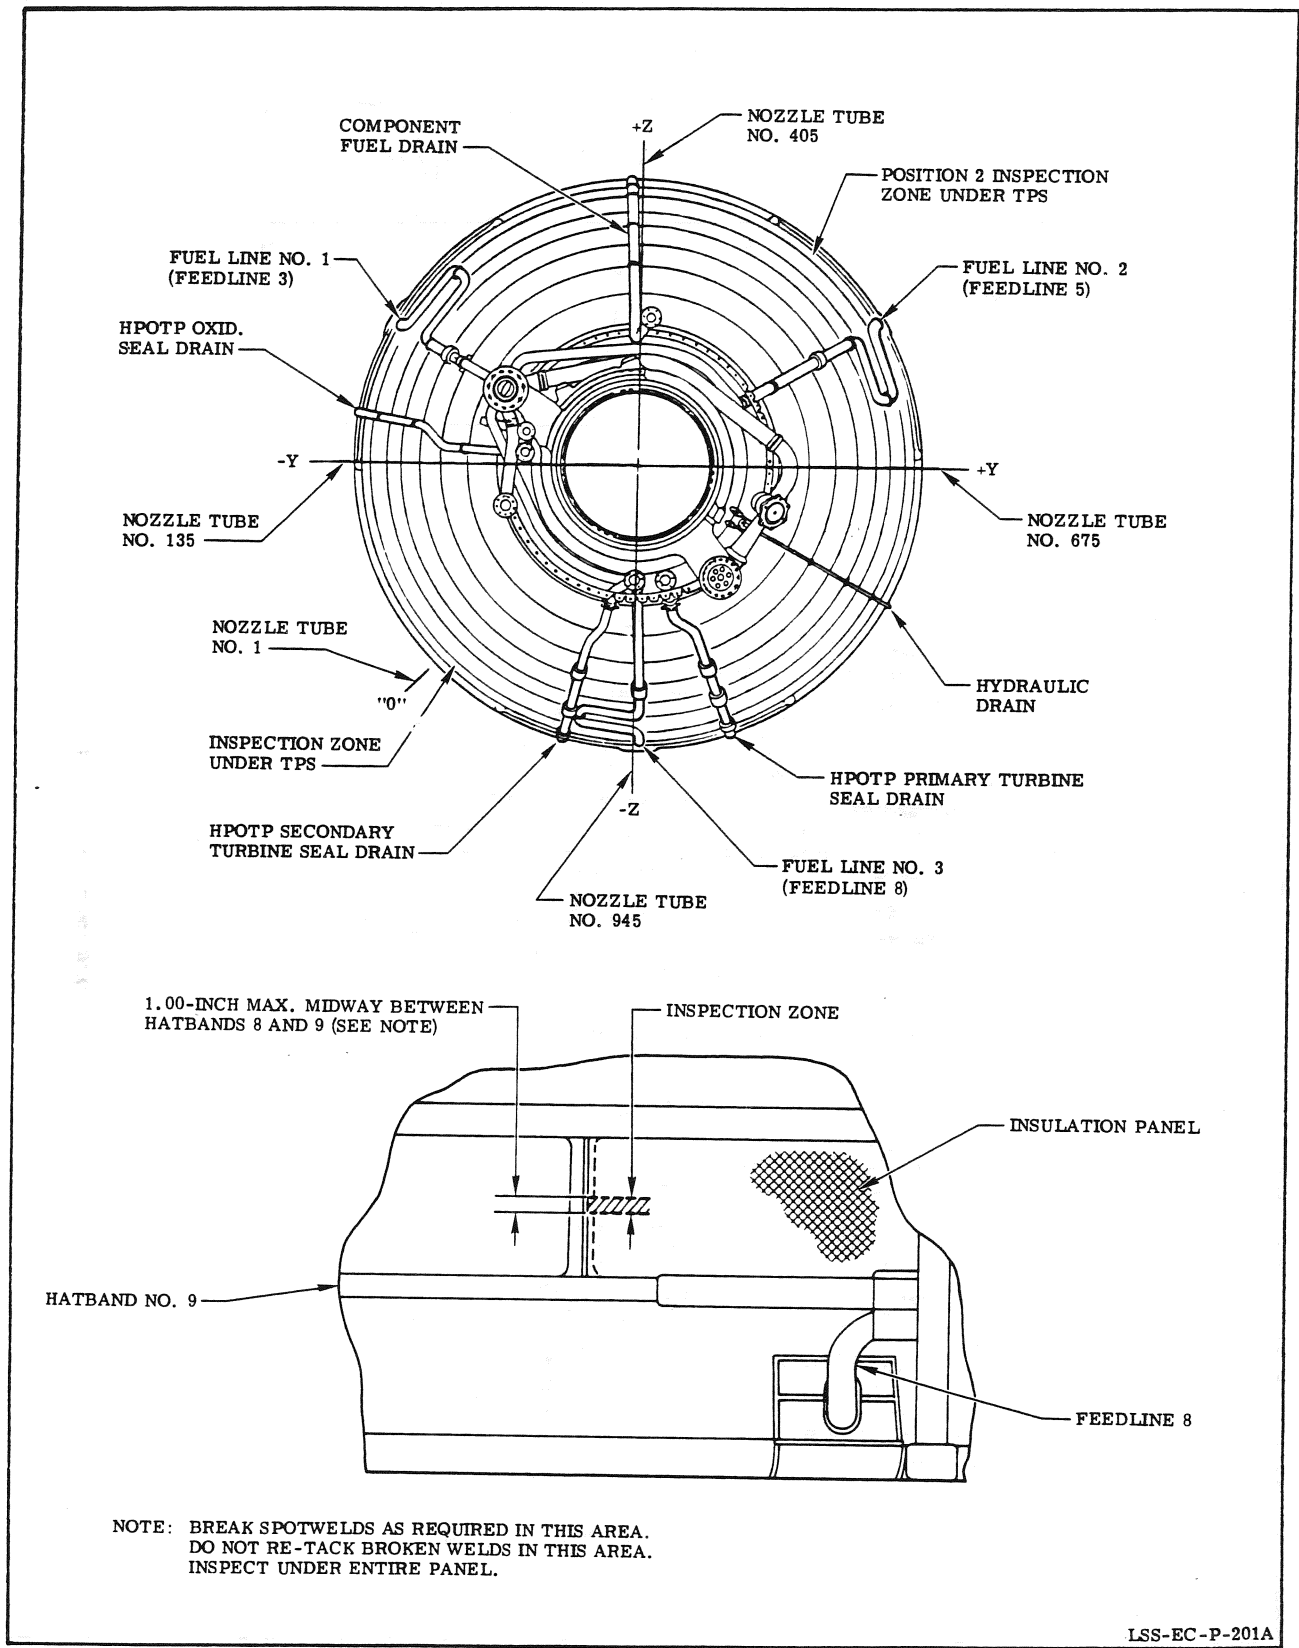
Engine Nozzle Insulation Panel Inspection Zone (Sheet 1 of 2)
